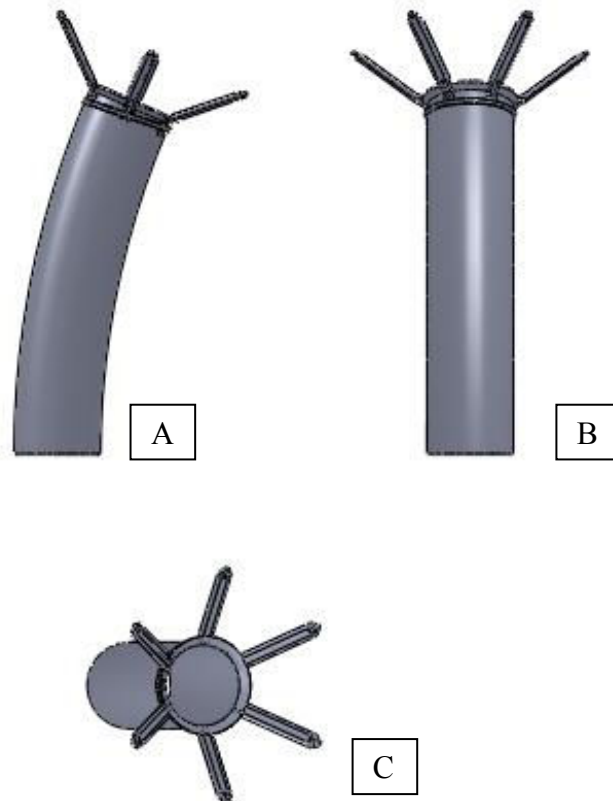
PASS after design changes. (A) Isometric view; (B) front view; (C) top view.
